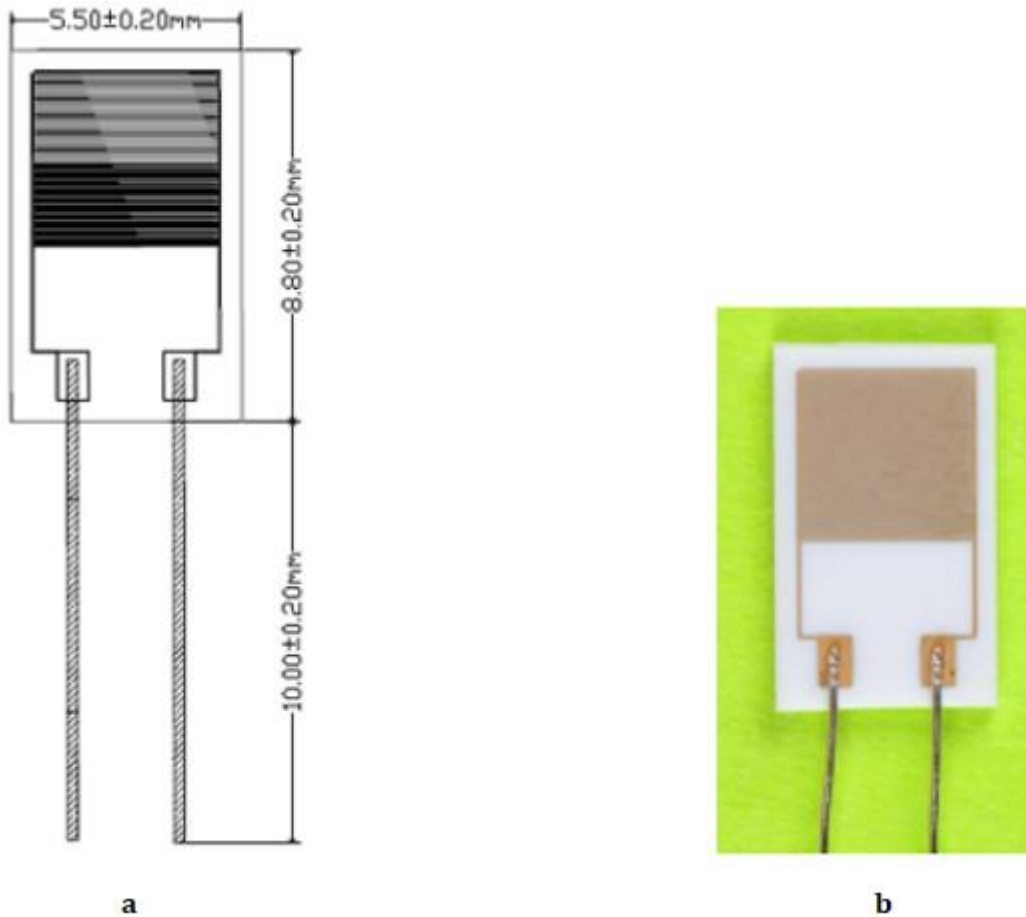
a) Dimensions of IDT sensor, b) Center-view of the IDT surface [1].
